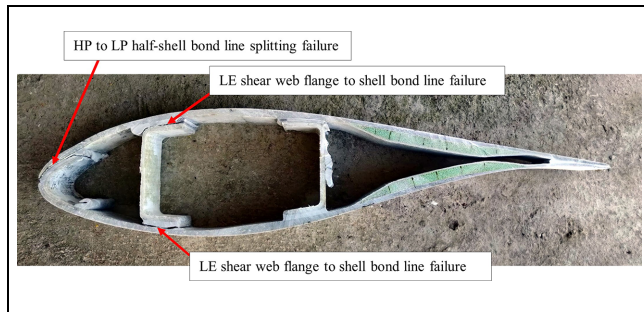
Station 7 after sectioning at completion of the test showing failure locations.
